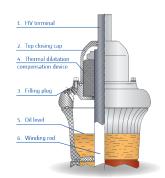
H2 head type (Bottom connection up to 170 kV - 2000 A)
